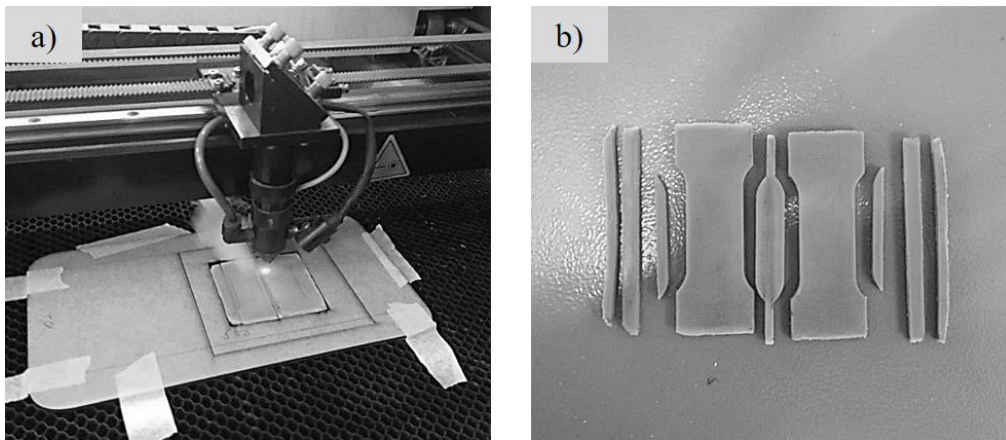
a) CNC Laser cutting machine for thermoformed parts whether for clean contours or hair-thin perforations; b) laser cut tensile test specimens.
